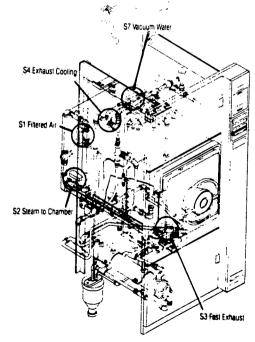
Solenold Valves (Vacamatic Unit)
